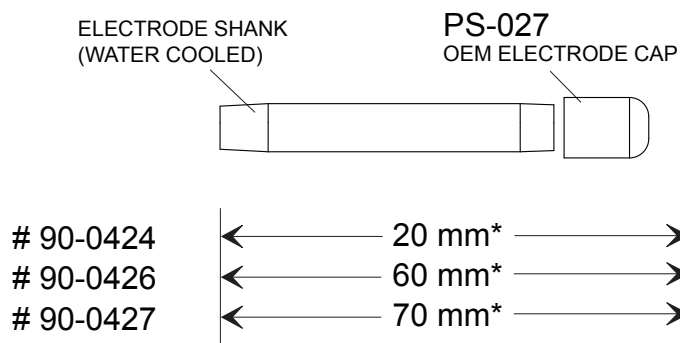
Extension arm - Welding electrode configuration chart
